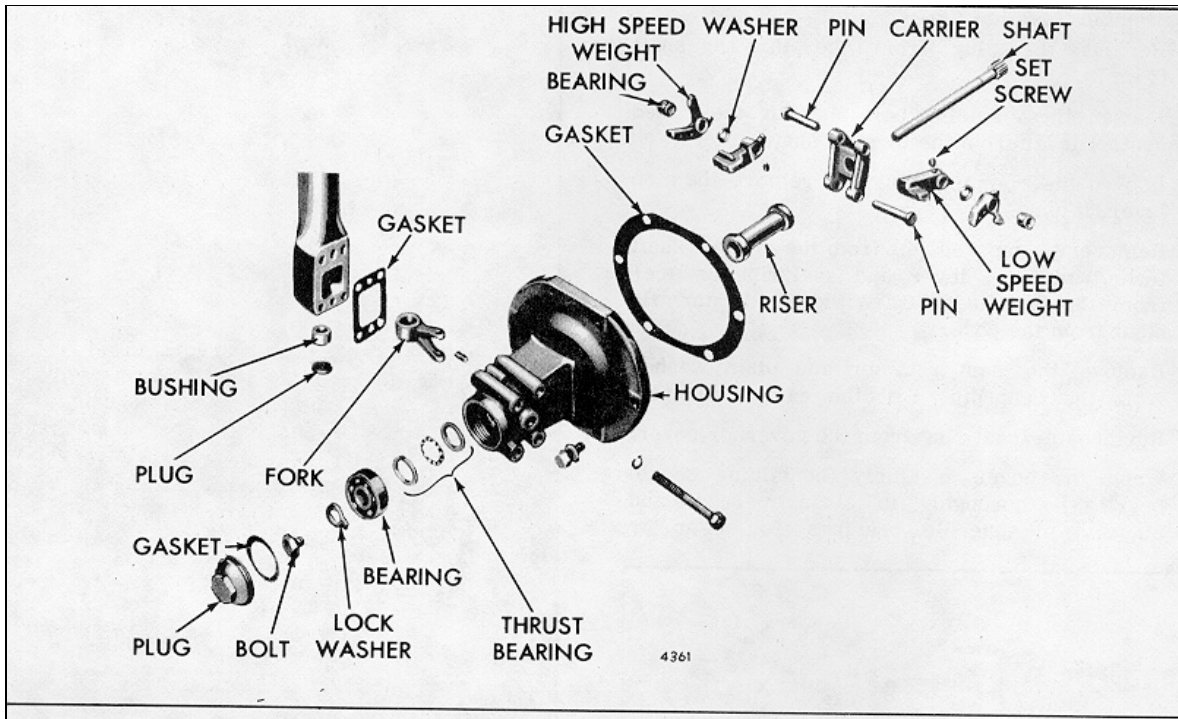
Fuel Modulating Governor Weight Housing Details and Relative Location of Parts
